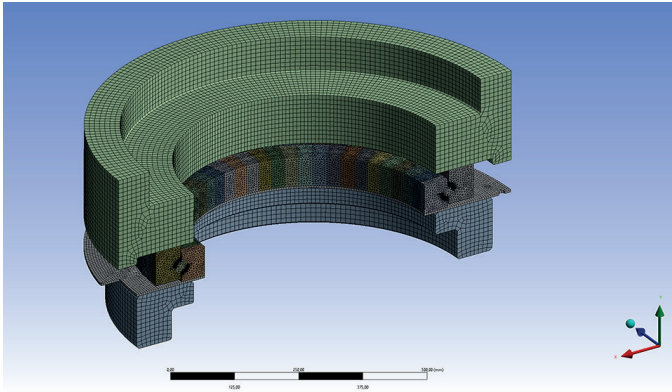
FEM model of a single-row ball slewing ring with clamping accessories conforming to the testing device conditions
